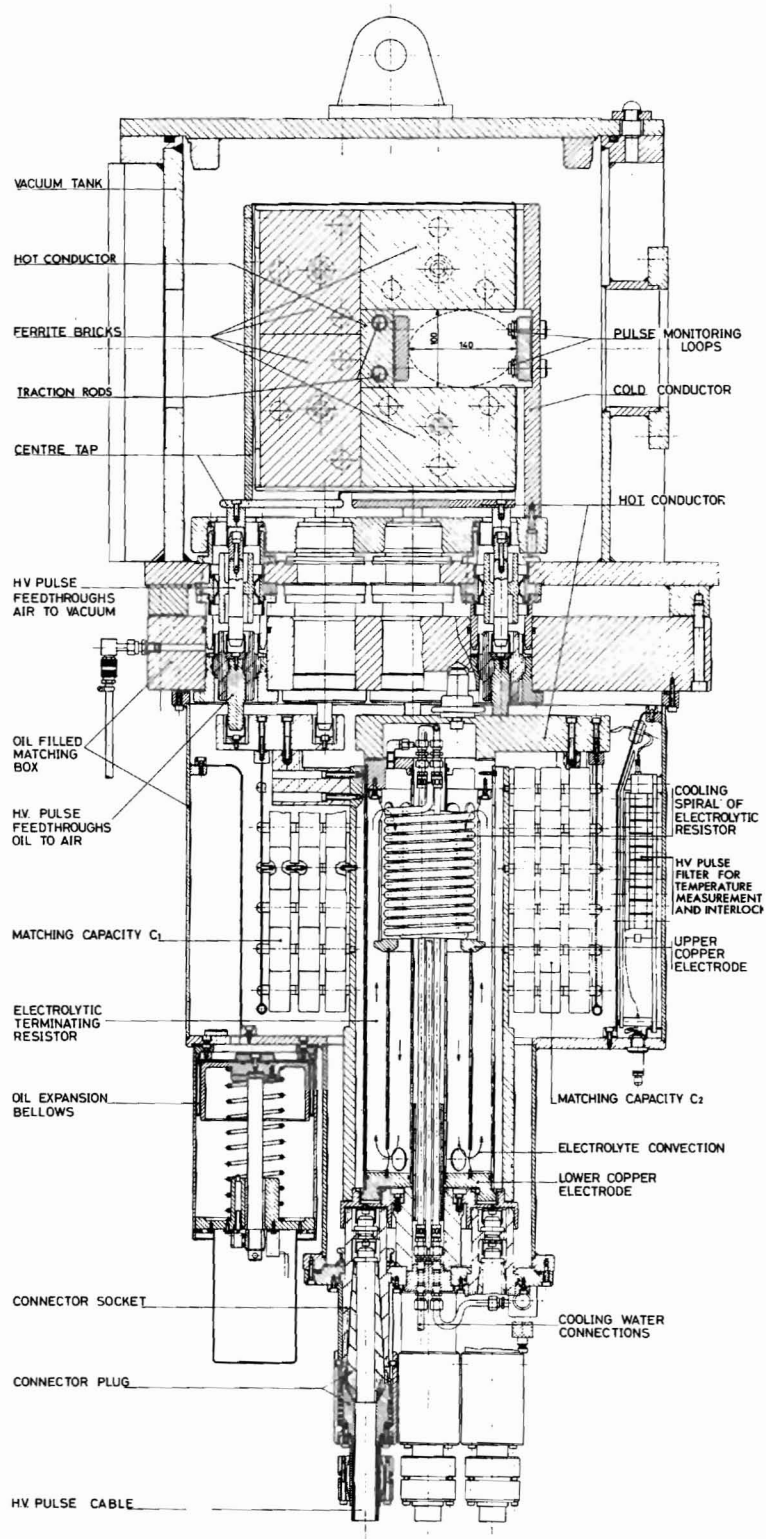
Section through one kicker magnet module in vacuum tank and its matching box.
